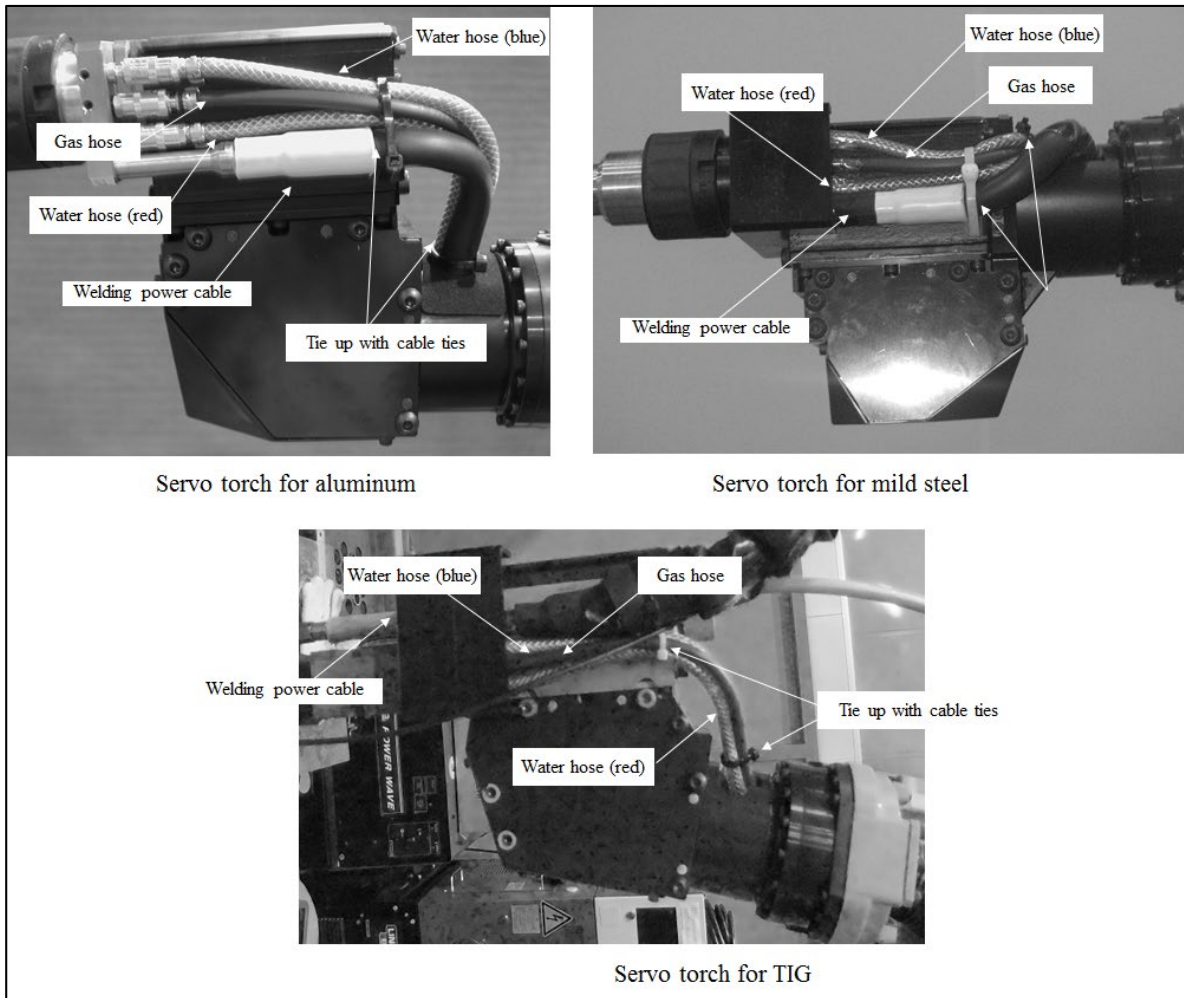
(g) Forming cables to bracket (4/5)
